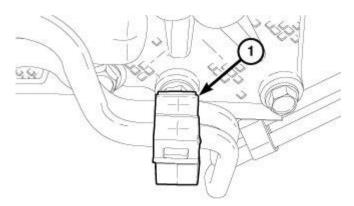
Engine Oil Cooler, Filter, Coolant Hose, Bolt & Lower Radiator Hose Courtesy of CHRYSLER LLC
